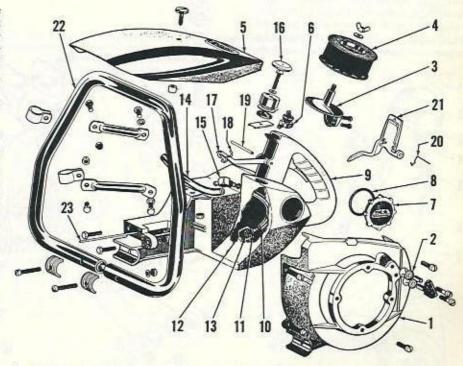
Exploded view of fuel tank, blower housing and air cleaner assemblies for model 275 chain saw. Components of other model chain saws are similar except for models shown in Fig.
